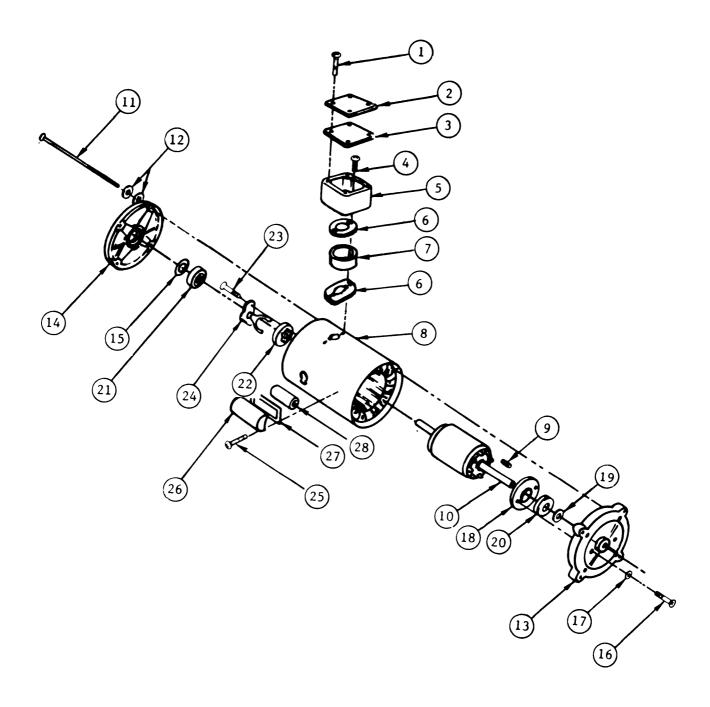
Chemical Feed Pump Motor Assembly (USMC)
